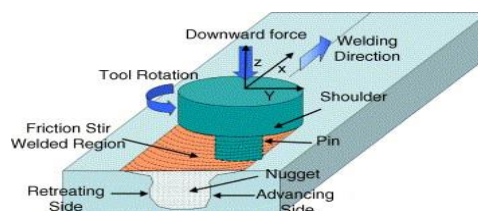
Schematic Diagram of Friction Stir Welding
